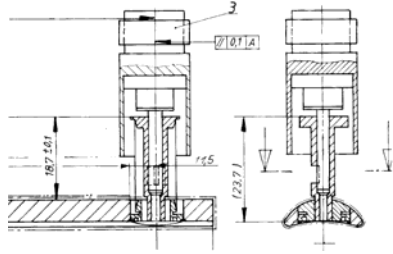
Cross cut of the technical manufacturing drawing in a complete monitor with the antenna
